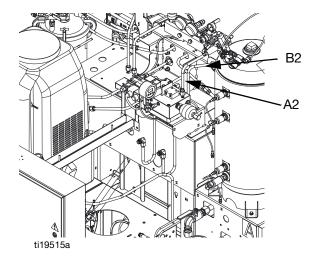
Hydraulic Fittings on Hydraulic Housing
